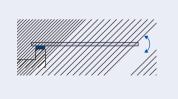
Mounting of a onesidedly clamped bending actuator by gluing
